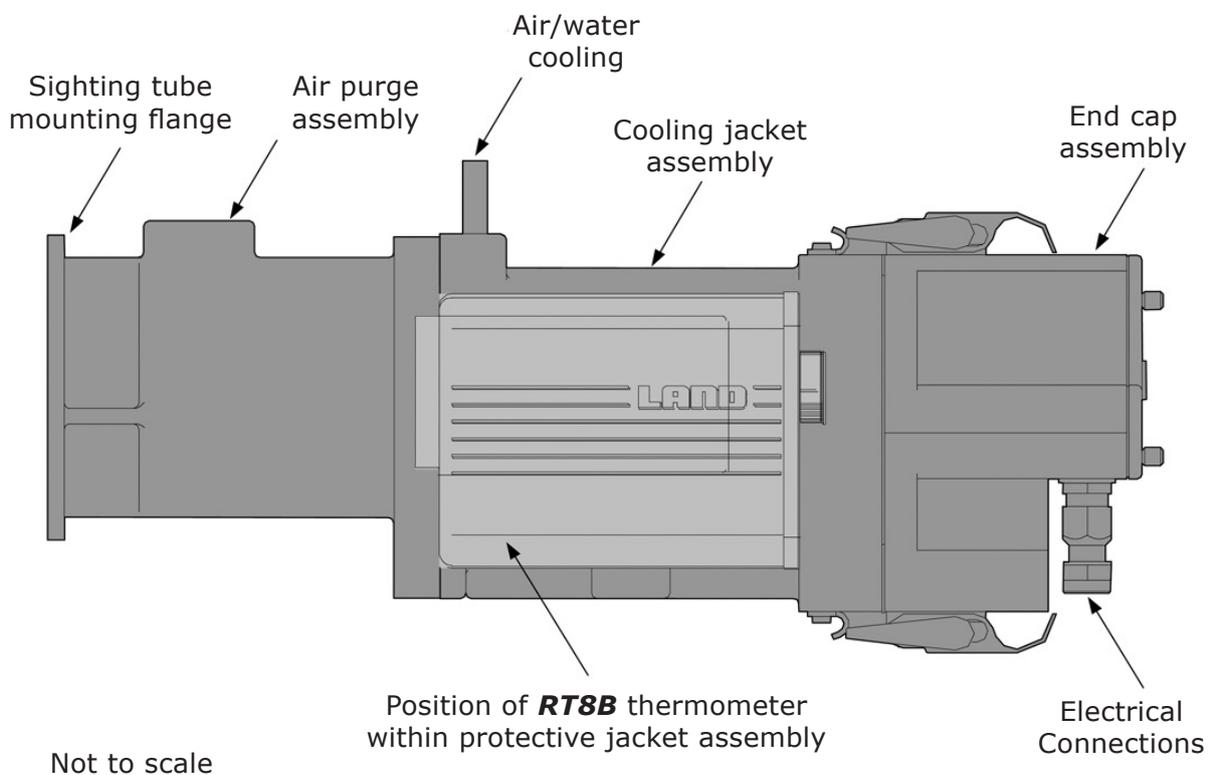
Location of RT8B thermometer in protective jacket assembly
